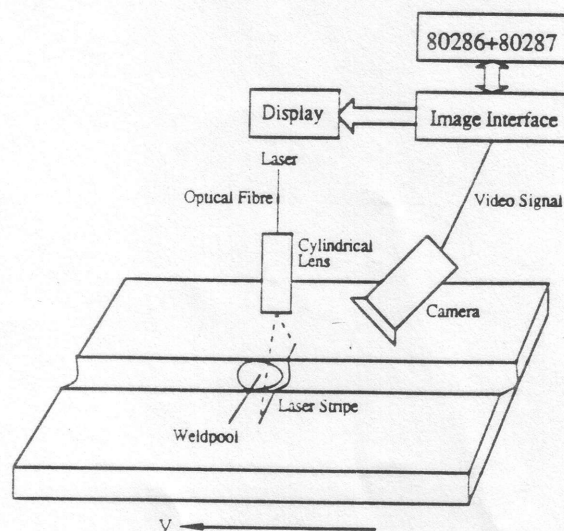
Three-dimensional vision sensing of full penetration. The intersection of the laser and weld path can be sensed to compute S , b , and h shown in Fig. 1.
